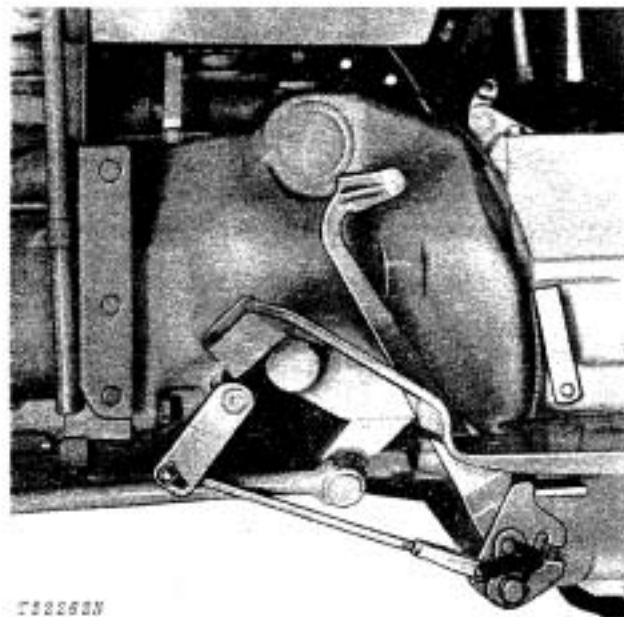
Clutch Pedal Shaft Arm Adjusting Screw
